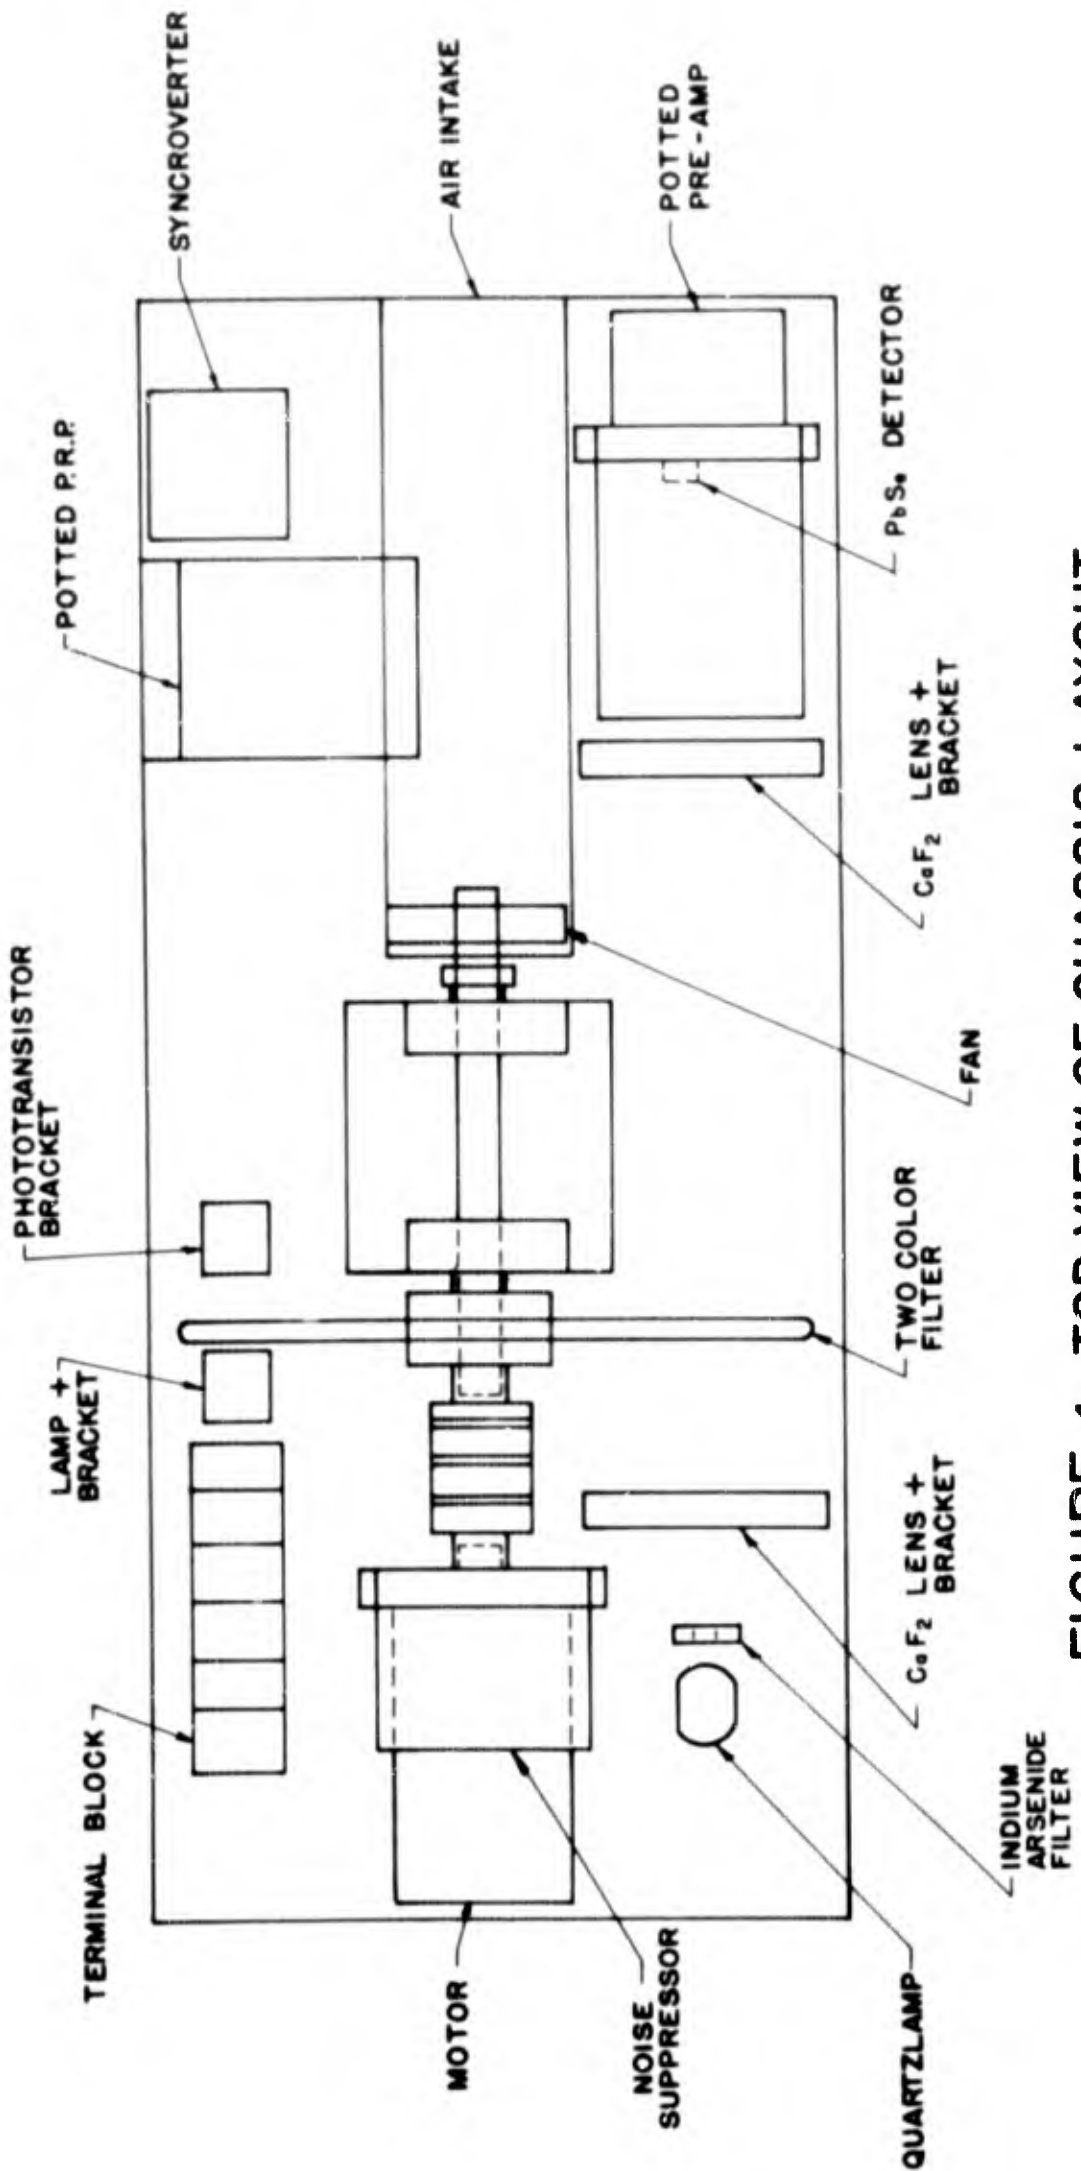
TOP VIEW OF CHASSIS LAYOUT
